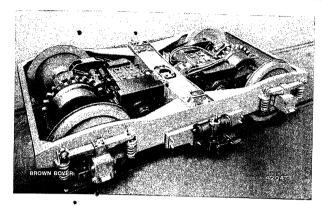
Bogie of the four-axle motor coach with built-on driving motors.
